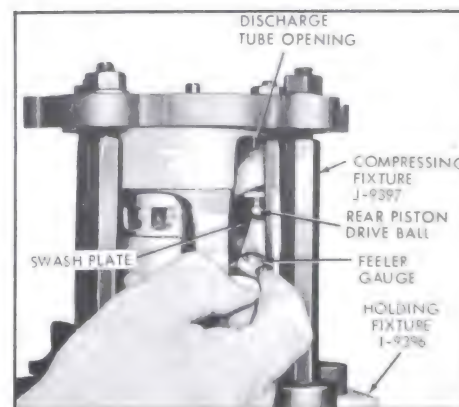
Gauging Clearance Between Rear Drive Ball and Swashplate
